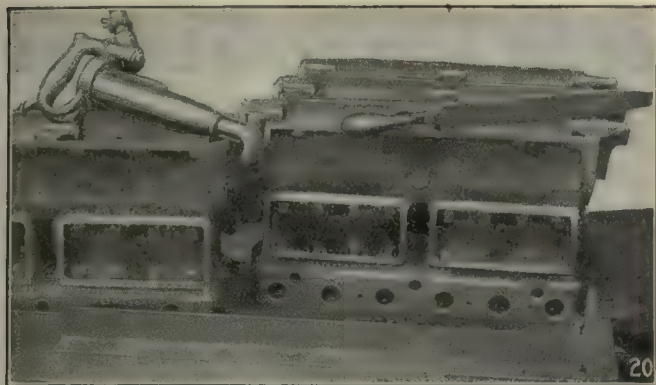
PEENING AND TRIMMING THE BEARINGS
